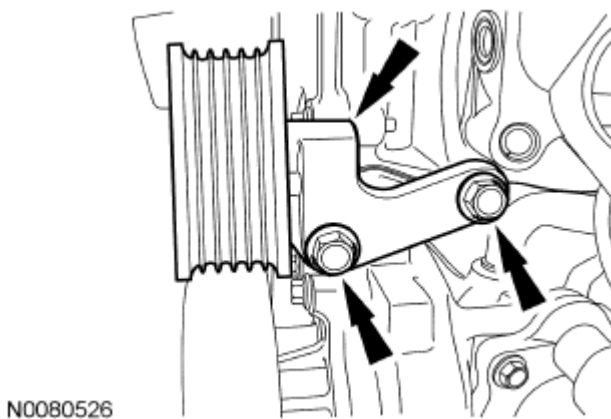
Locating Bolts And Accessory Drive Belt Idler Pulley Bracket
